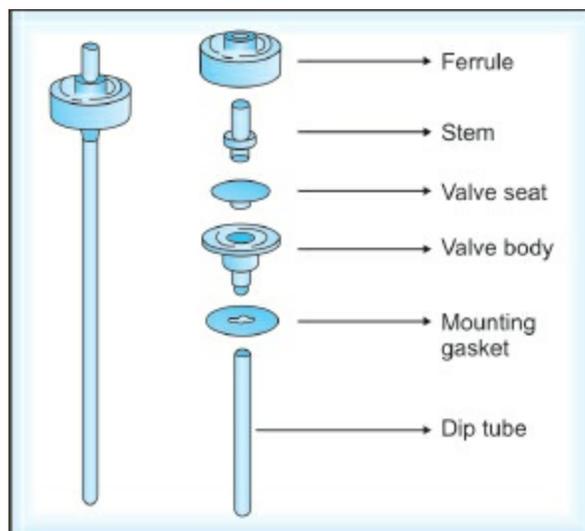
Aerosol bottle valve assembly (*Courtesy of Risdon Manufacturing Co., Naugatuck, CT*)
